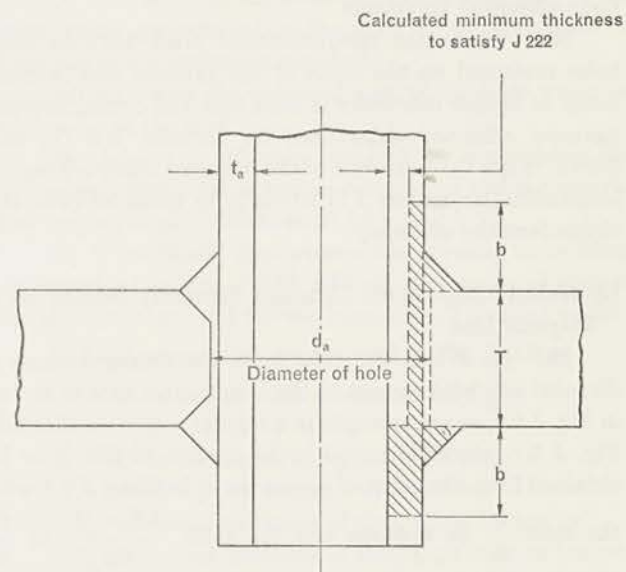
COMPENSATION OF WELDED TUBE STUBS
